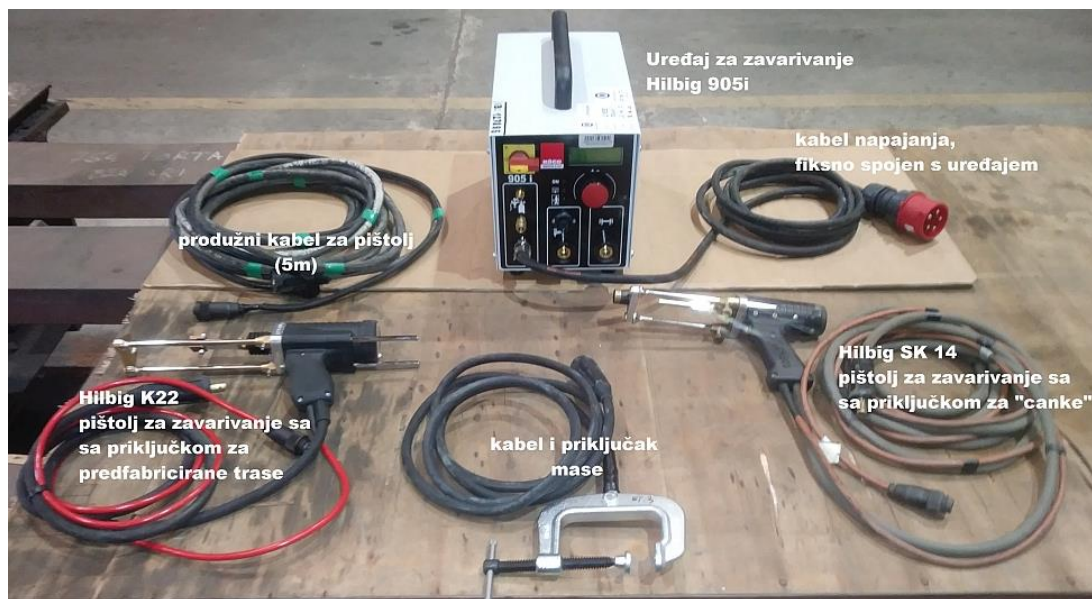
complete system for welding electric cable holders and isolation pins
